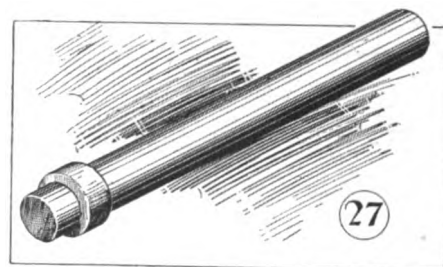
This piston-pin bushing driver is turned out of a solid piece of steel, the diameter of the collar being smaller than the diameter of the bushing and the shaft fitting into the hole
